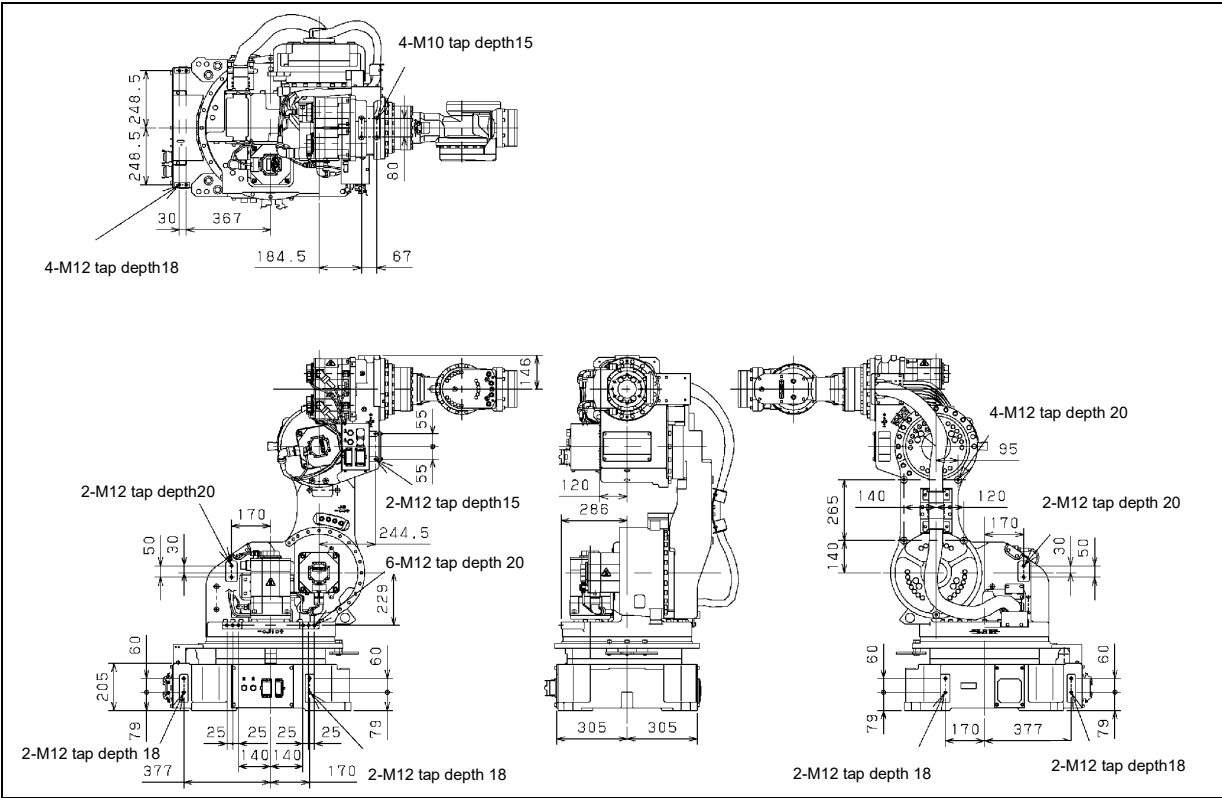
(l) Equipment mounting faces (R-2000iB/165CF)
